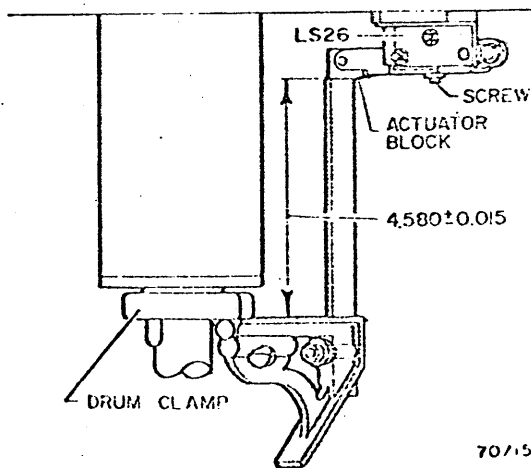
Drum Interlock Switch (LS26) Adjustment
